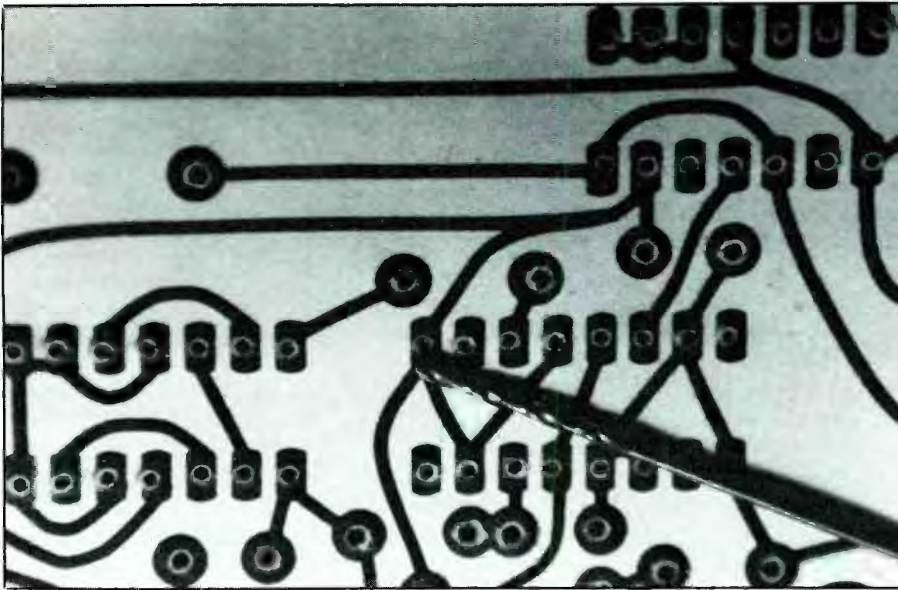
After rubber cementing photocopy of original actual-size artwork to copper-clad side of pc blank, drill all component lead and pin holes and mounting holes for board.
